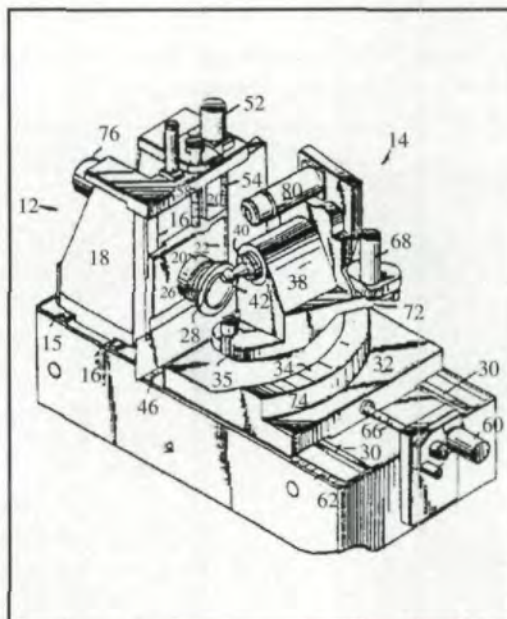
CNC bevel gear processing machine, Gleason Phoenix.
